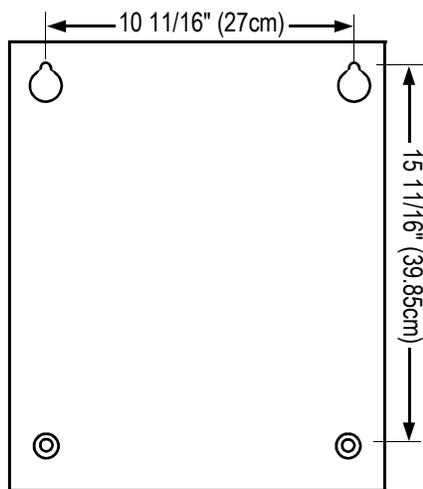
Expansion Unit Cabinet Mounting Hole Dimensions
